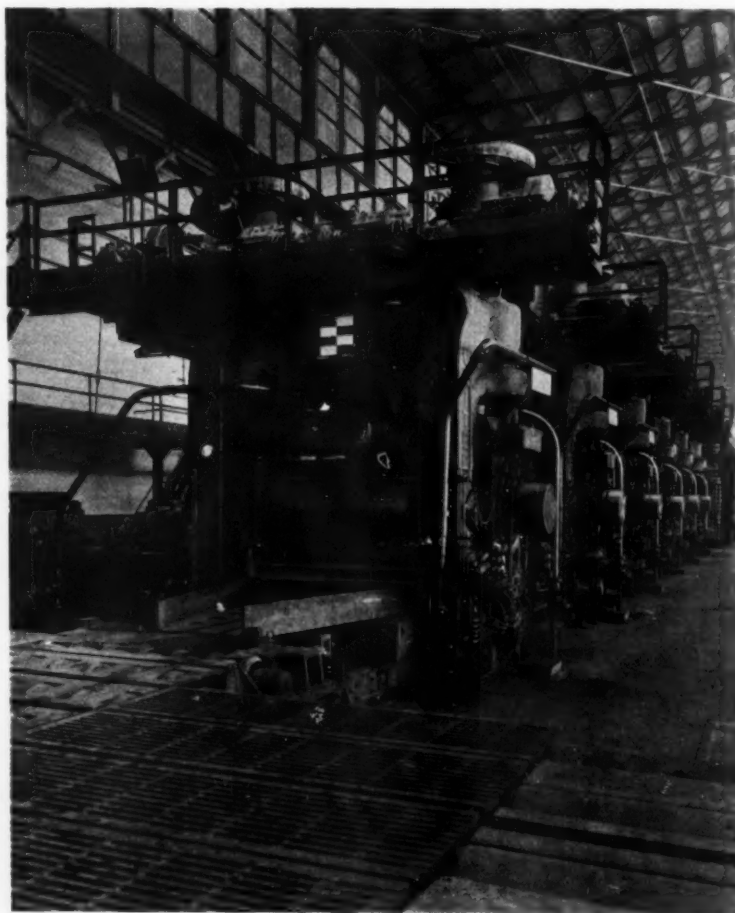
FINISHING STANDS OF 96-IN. PLATE MILL
